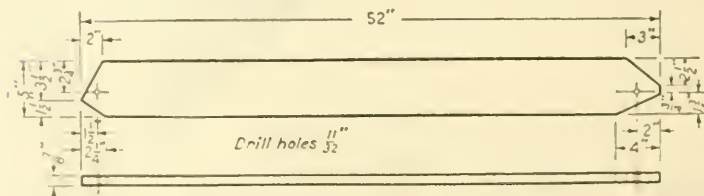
Extension butt chain board, Massey-Harris corn binder
